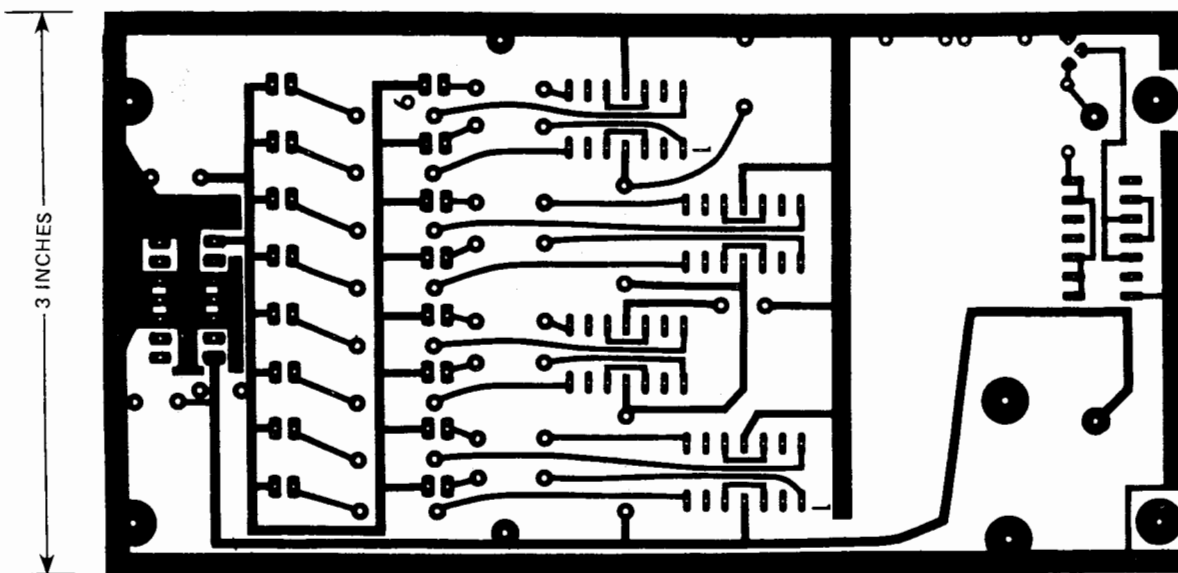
"FOIL-SIDE" of display board. Note that, while board is double-sided, holes need not be plated-through.
